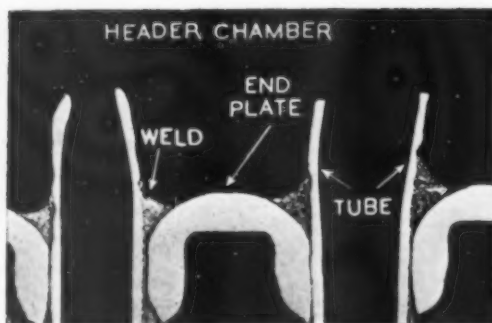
Section through end plate and two tubes of radiator shown in Fig. 9.  $\times 4$ .
